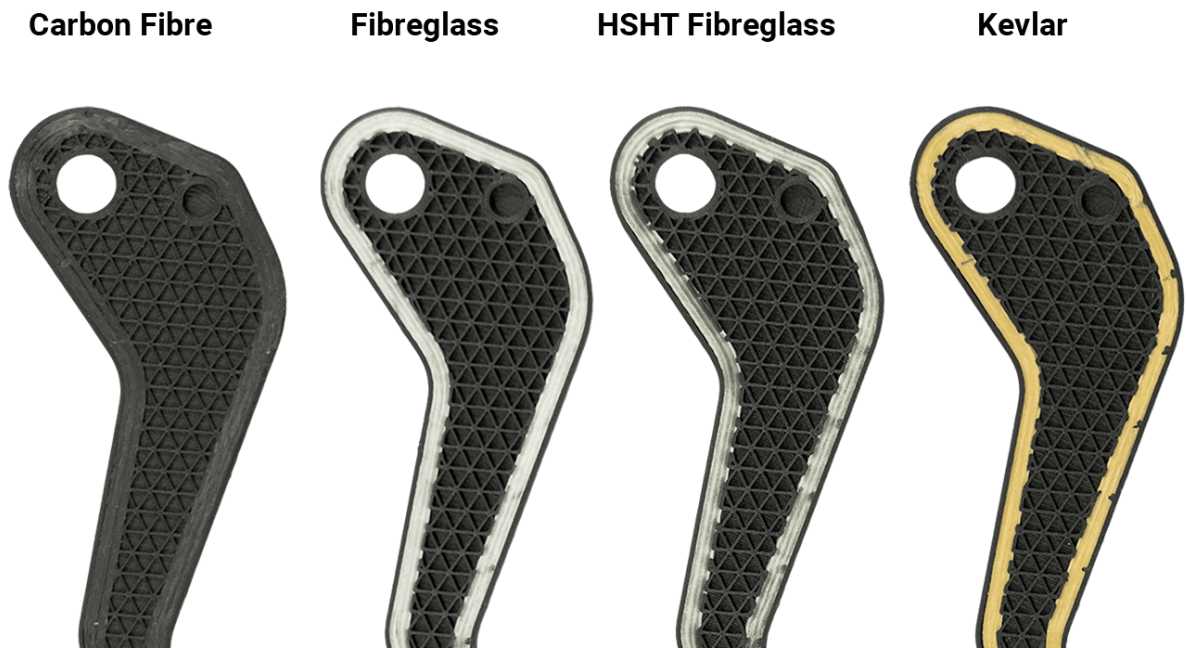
Cross-sectional view of printed parts using Markforged process (Qualified3D)
